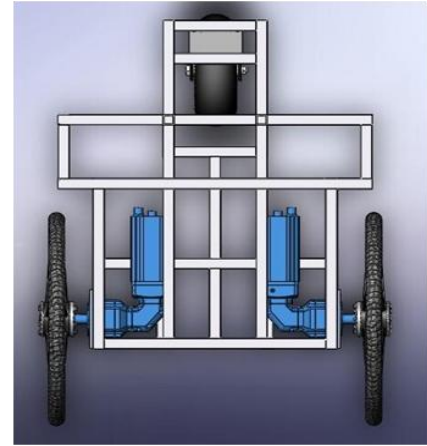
SolidWorks representation of the removal of brackets, bearings, and shafts
